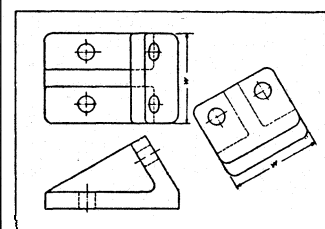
RIGHT AUXILIARY VIEW, PROJECTED FROM THE FRONT VIEW
